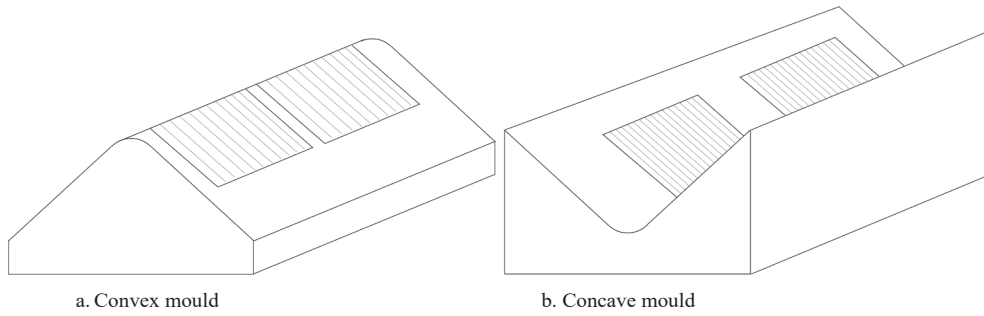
a. Convex mould, b. concave mould used for manufacturing.
